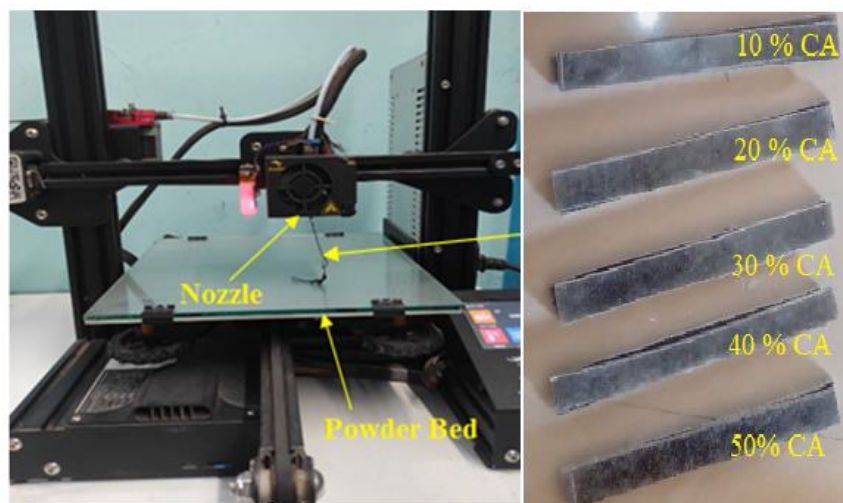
3D printing machine and Photograph of PLA/CA specimens
